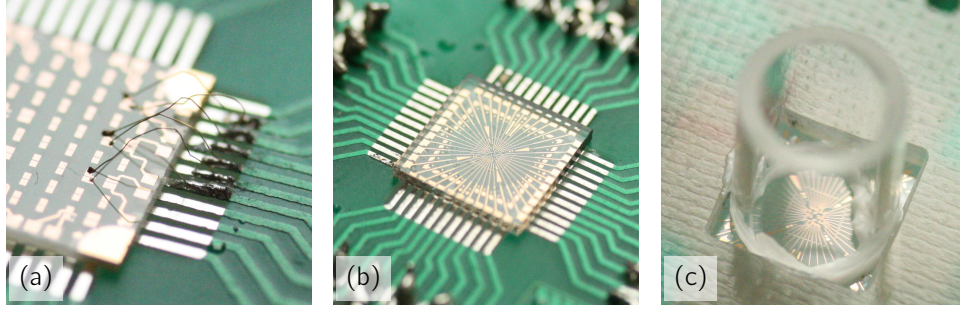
Sample mounting techniques. The sample size is $10 \times 10 \text{ mm}^2$. (a) Bonding with gold wires. (b) Flip-chip contacting, sample is mounted face-down on the PCB. (c) Glass ring with outer diameter of 8 mm mounted on a flip-chip contacted sample. In contrast to (b) the PCB is turned face-down.
